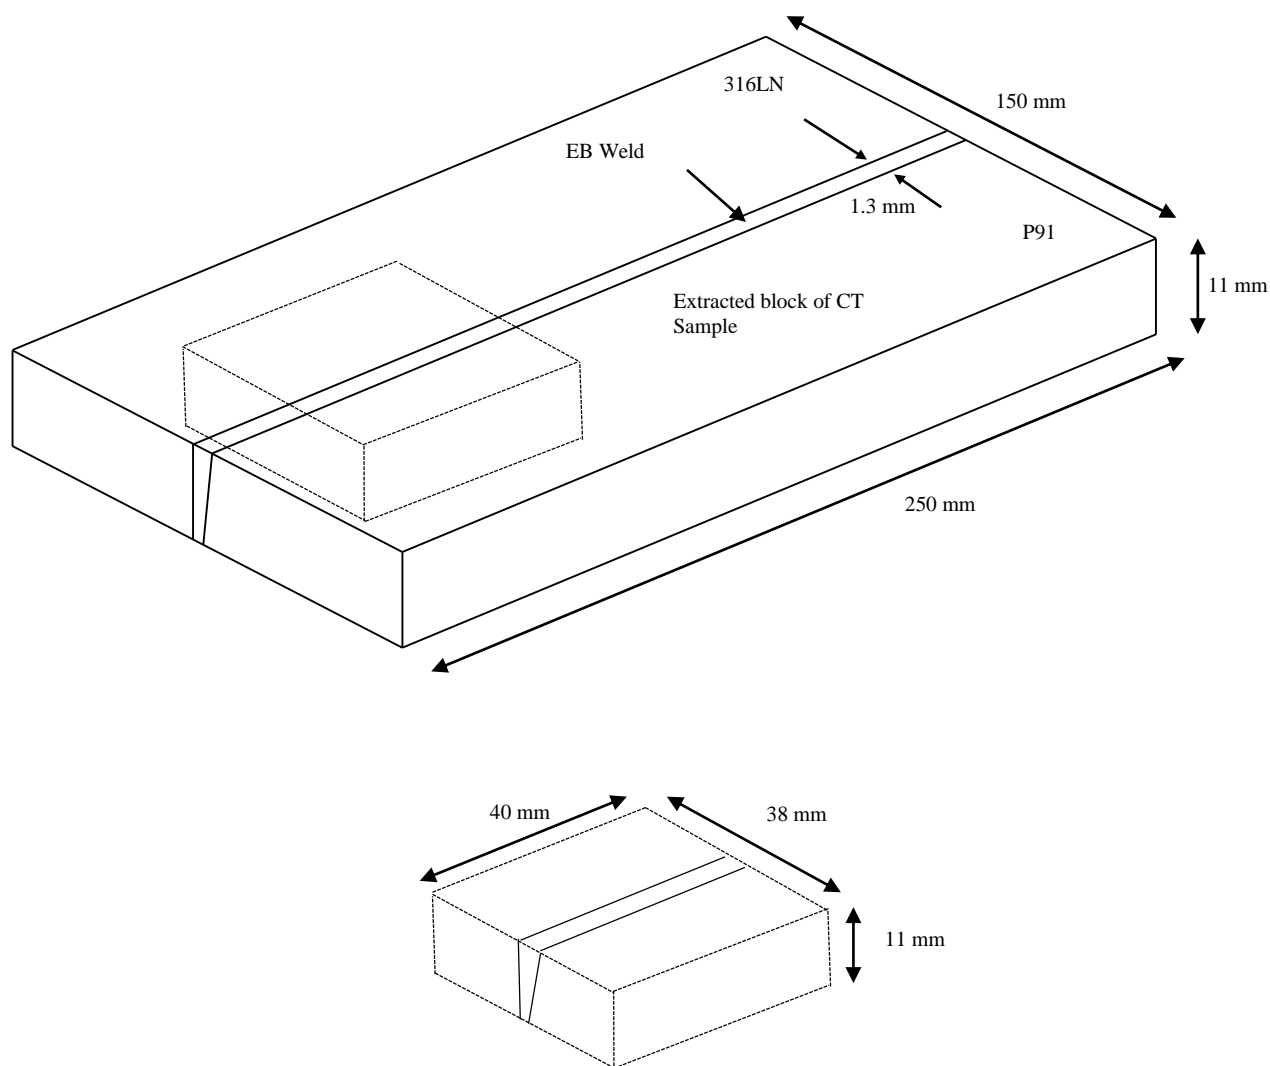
Schematic of the dissimilar metal weld pad and C(T) specimen
